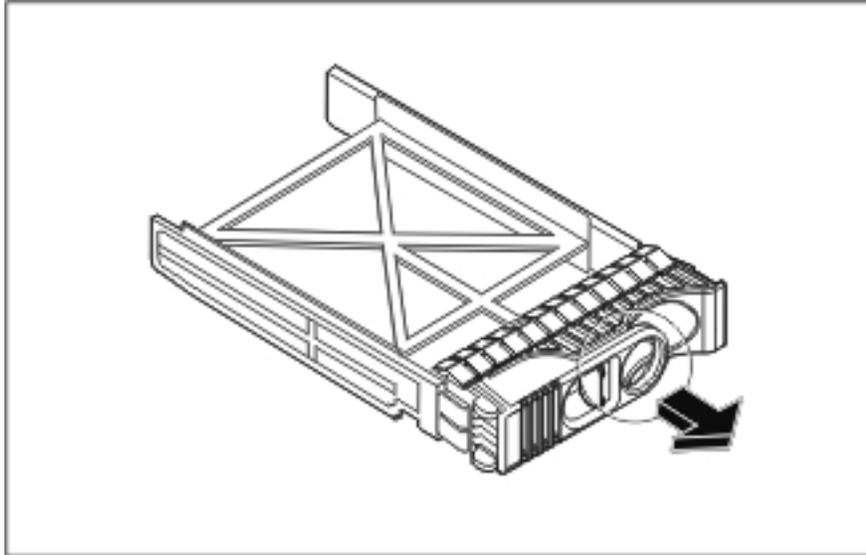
Removing the SCSI hot-plug hard drive blank carrier
